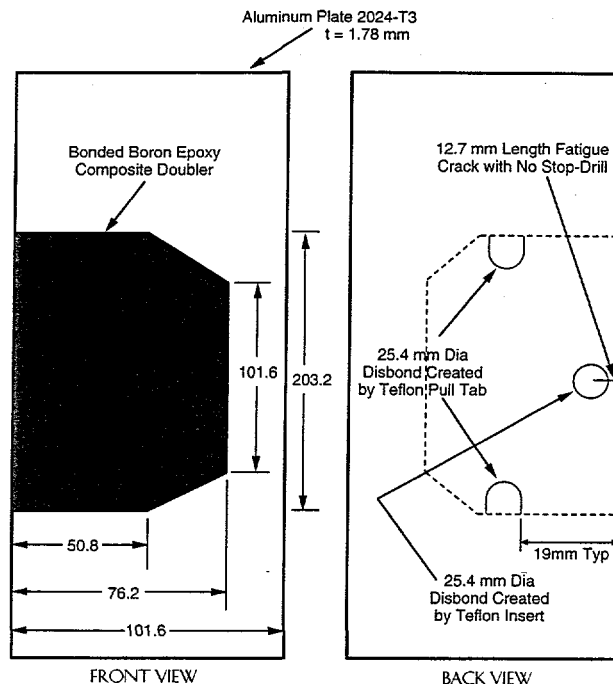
Composite Fatigue Test Specimen with Engineered Flaws
